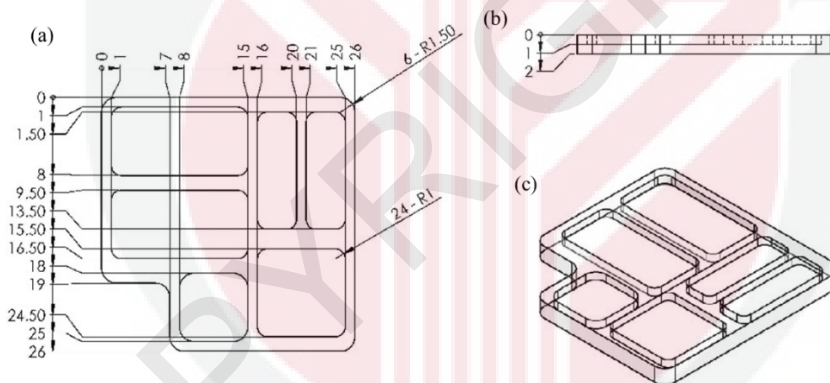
Dosimeter holder (D3) design: (a) Top view, (b) side view, (c) orthographic view
